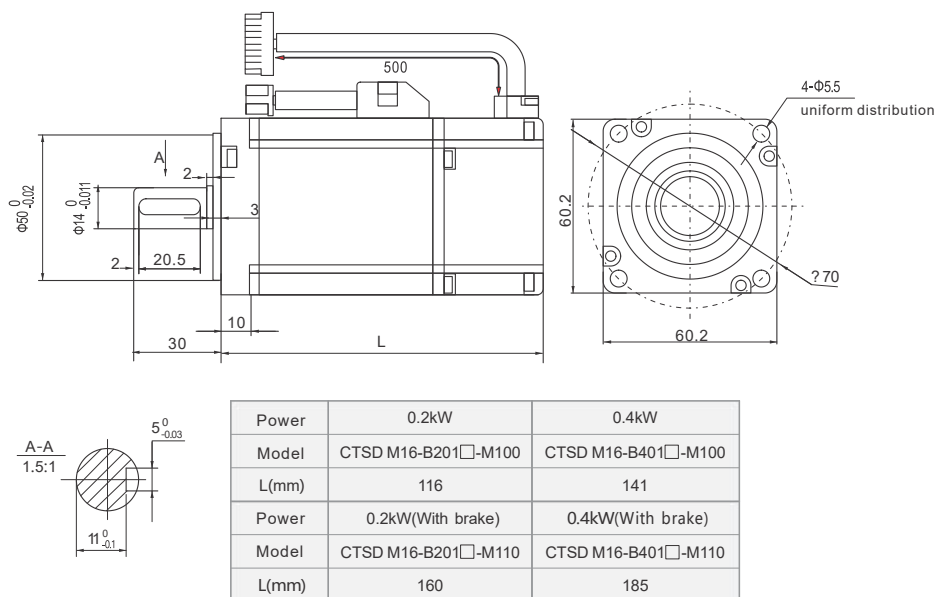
Motor dimension of 0.2kW/0.4kW
